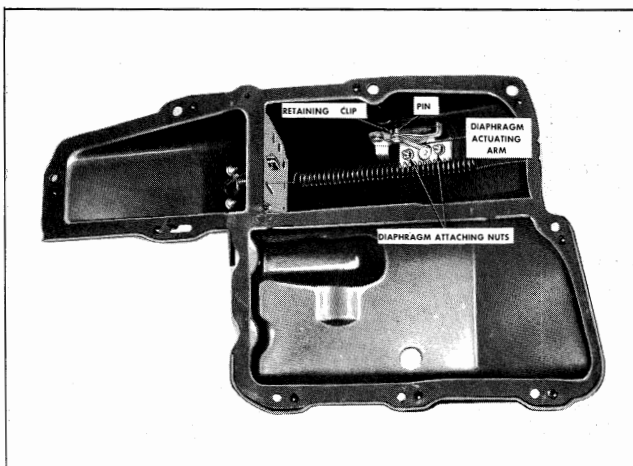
Air Inlet Blocking Diaphragm Parts
